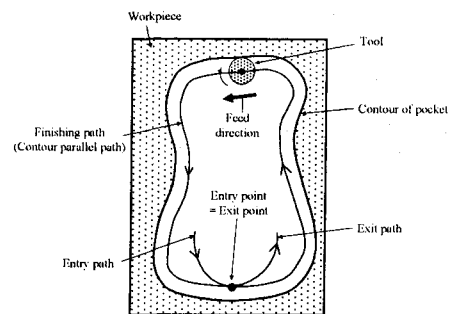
An example of contour parallel tool path in pocket machining using end mill
